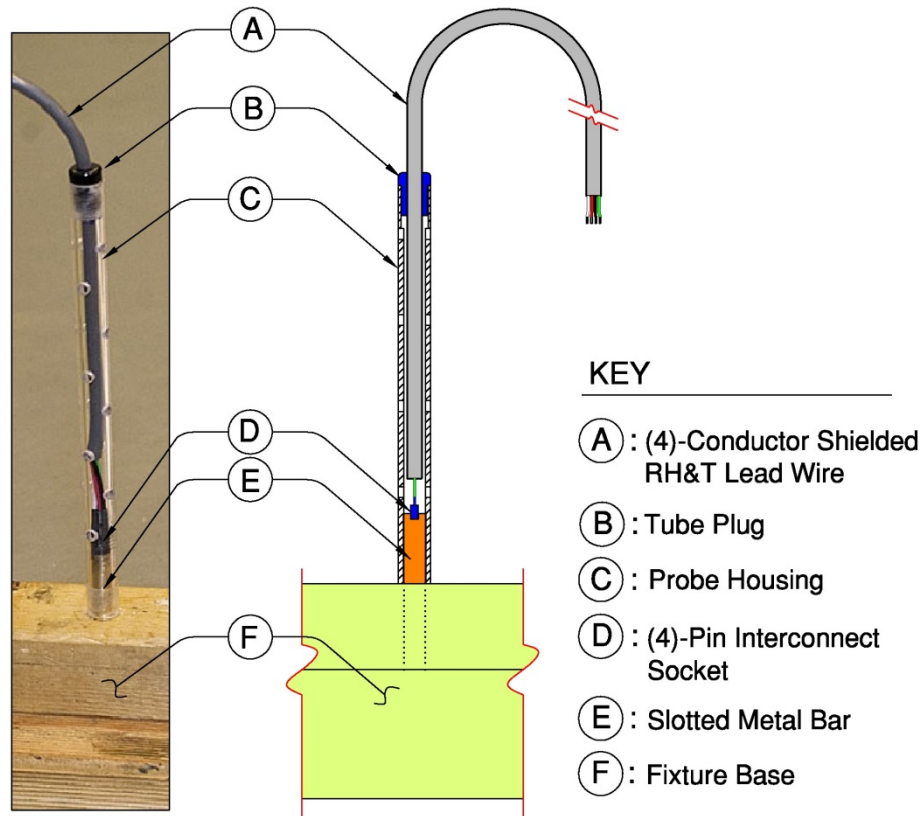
Example probe assembly prior to application of silicone (shown on the fixture)
